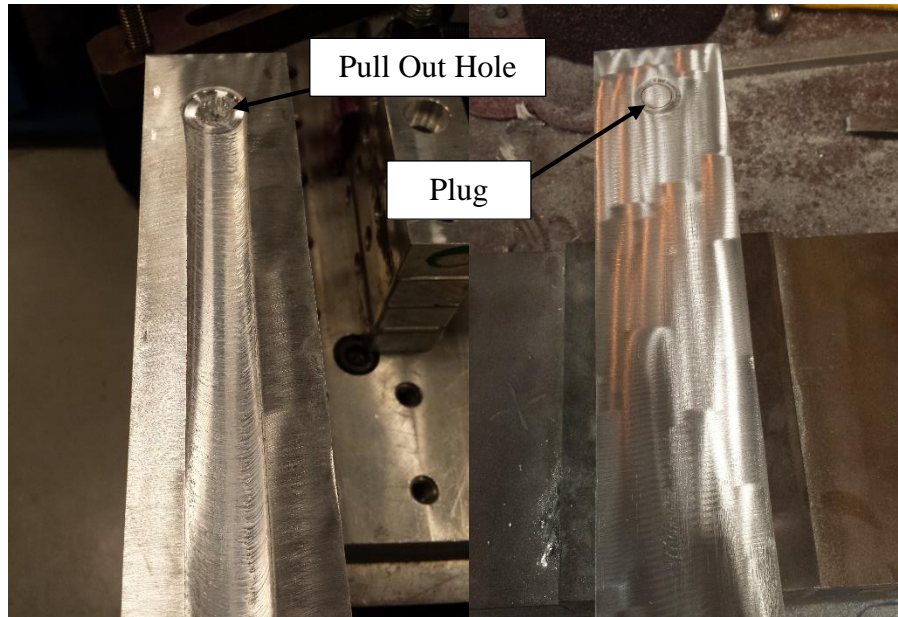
Friction Stir Weld Before Sanding (Left), After Sanding (Right)
